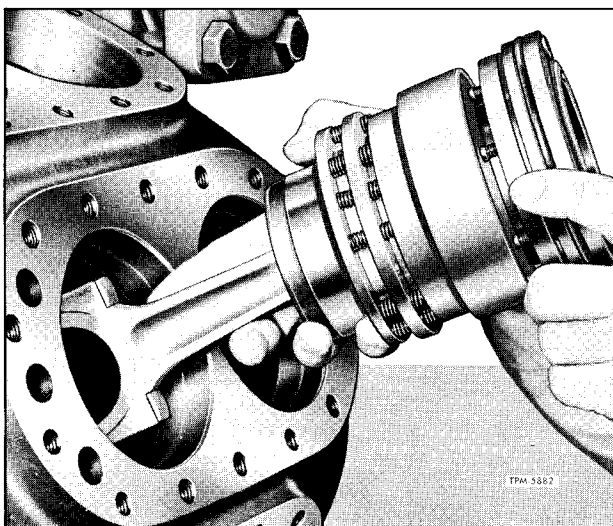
Installing Connecting Rod, Piston Liner, and Unloader Assembly
